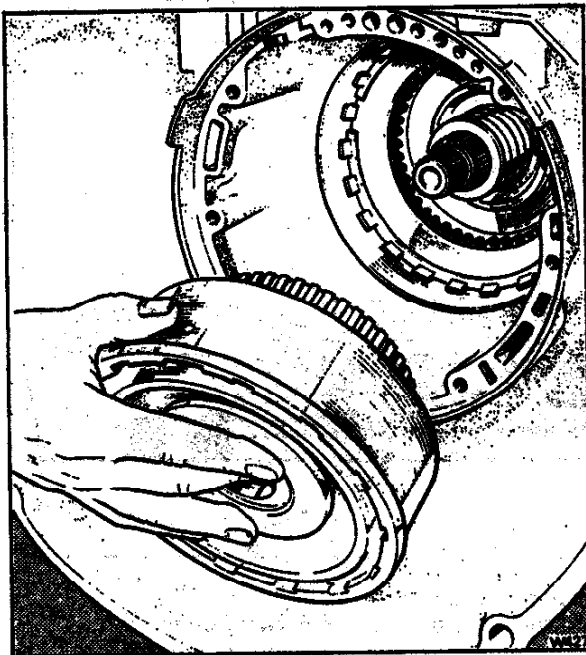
Removing the direct clutch and intermediate roller/sprag assembly
